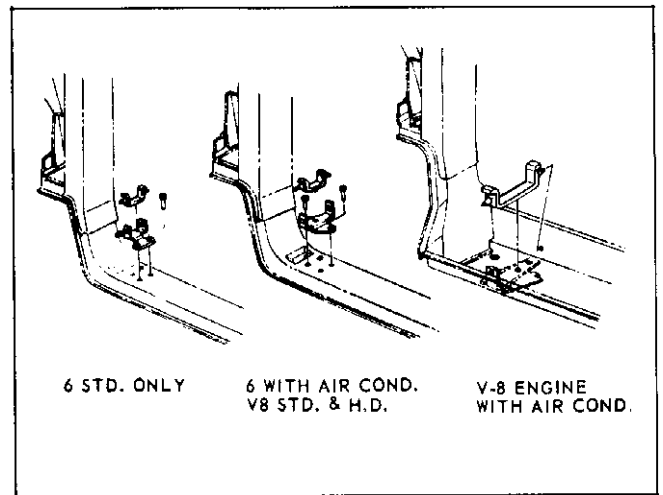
Tempest Lower Cradle Bracket and Insulator
